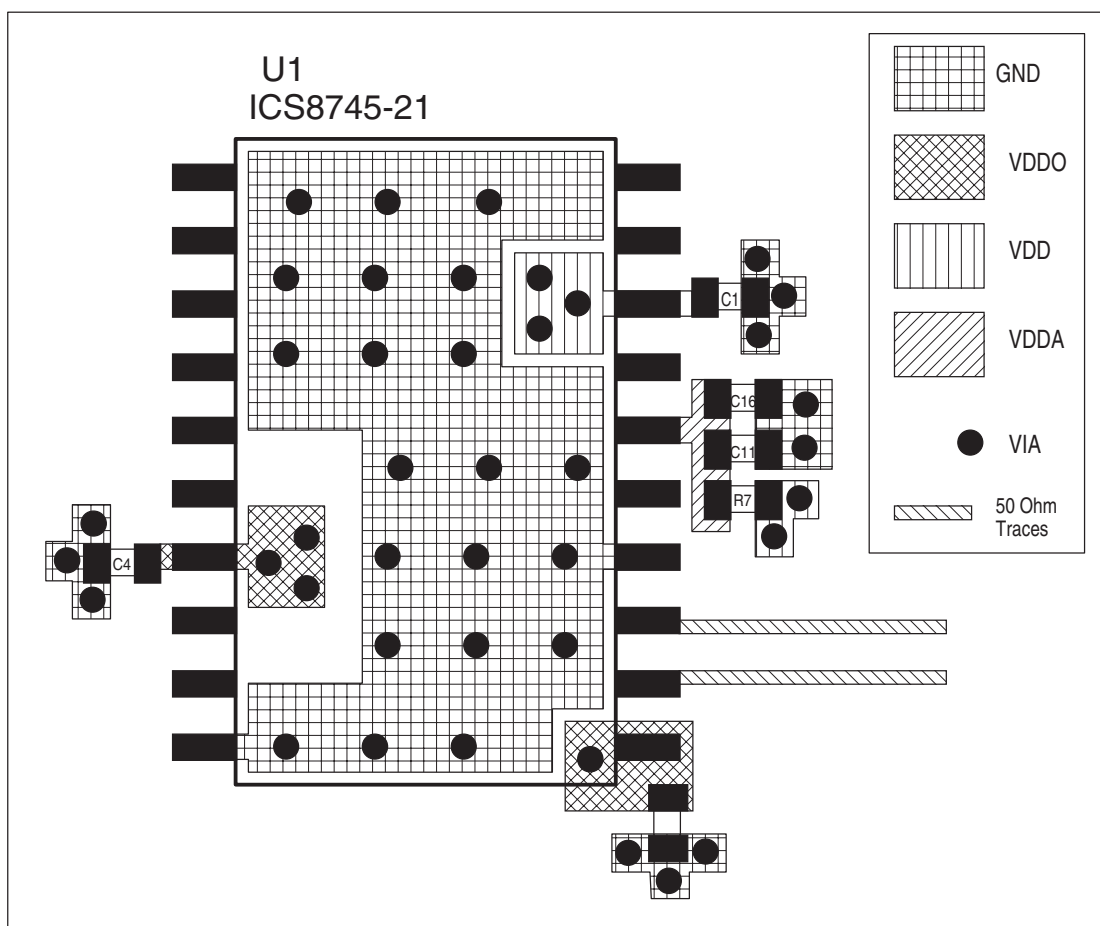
PCB BOARD LAYOUT FOR ICS8745-21
